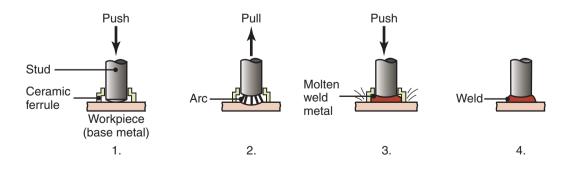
The sequence of operations in stud welding commonly used for welding bars, threaded rods, and various fasteners onto metal plates.
